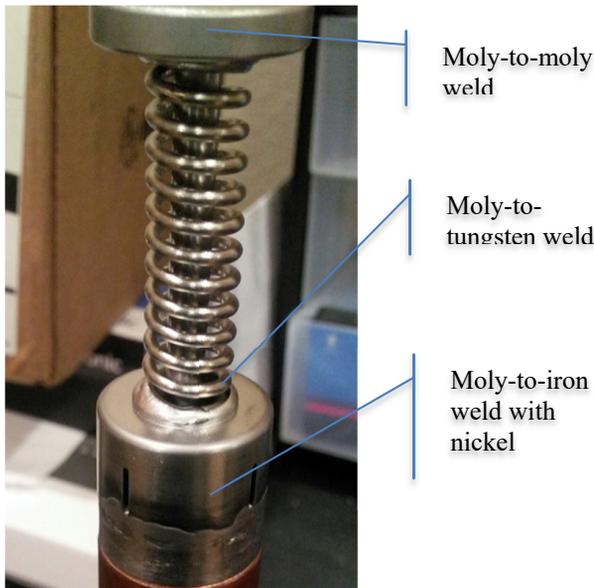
Example of filament welds for the Cathode Stalk of the magnetron.
